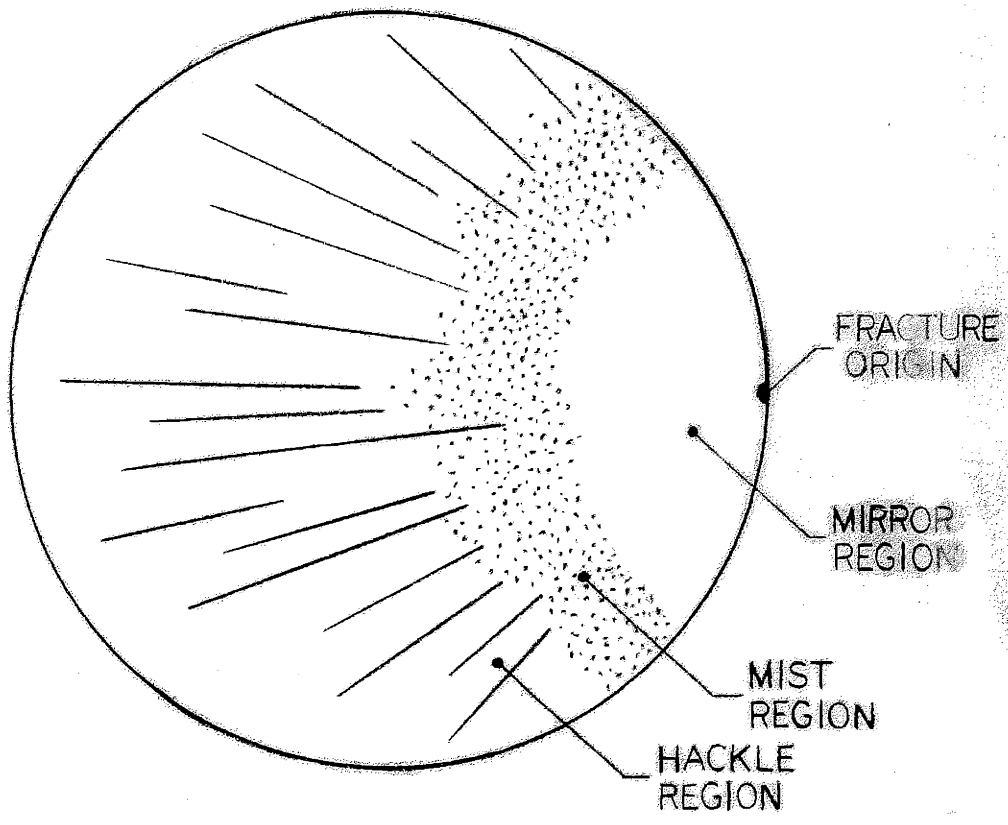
TYPICAL FRACTURE SURFACE MORPHOLOGY
